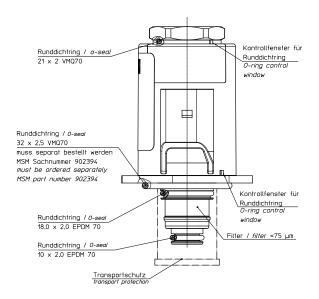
Type G PC S 040 K69 V01 (G013814 Index g)
